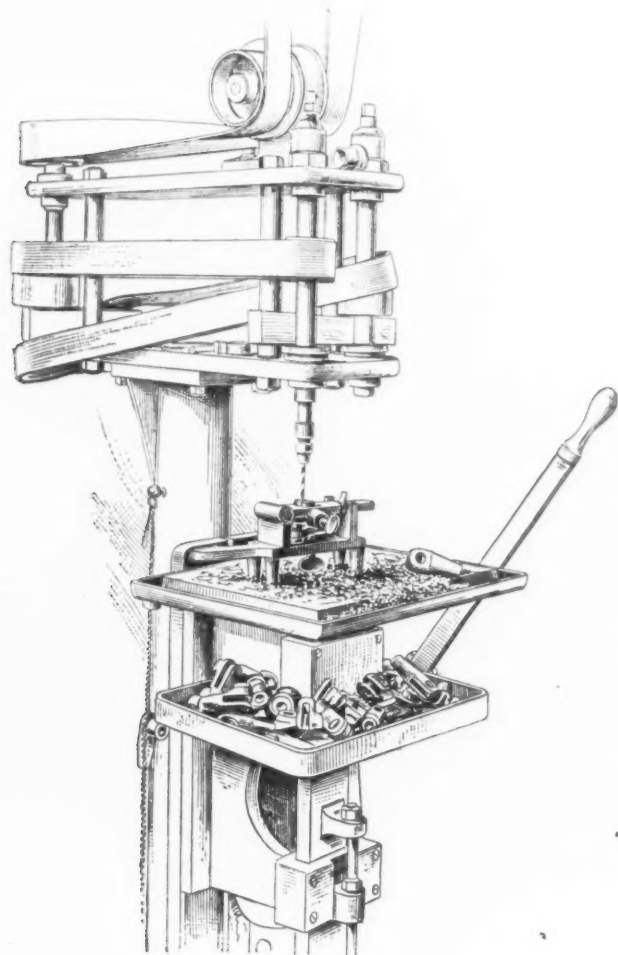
Drilling Holes in Ratchet Head for the Pawl Pins
